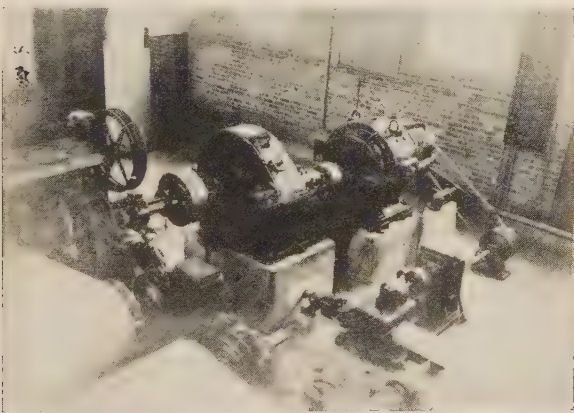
INTERLOCK DRIVE IN OPERATION ON THIRD PRESS SECTION OF 234-IN., NEWSPRINT MACHINE, 600/1000 FT. PER MIN
